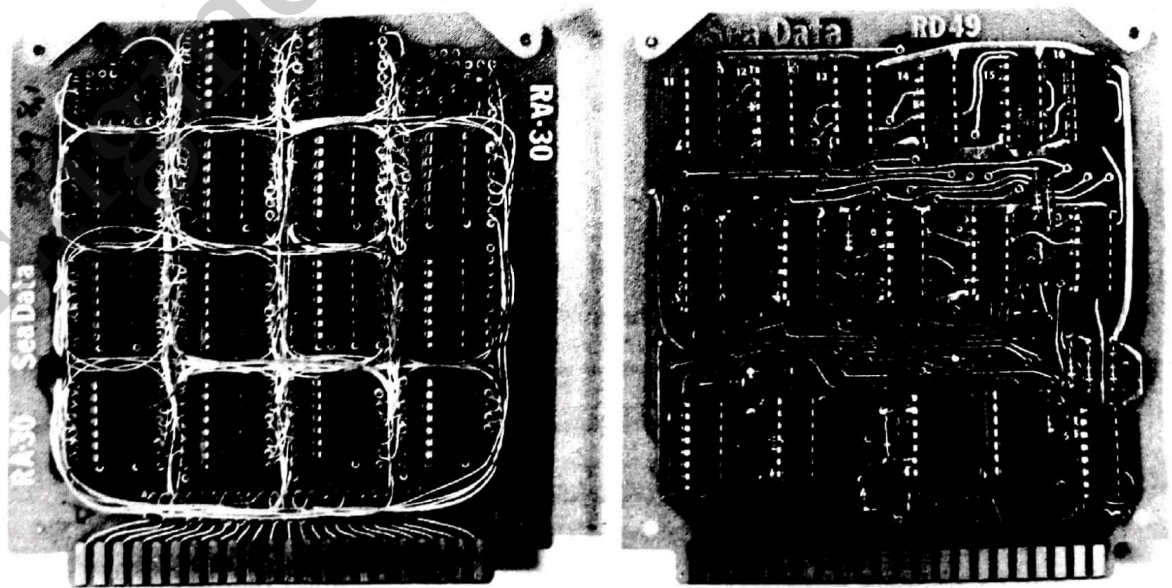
A Wire-Wrap prototype board and its printed-circuit successor. PC boards are less cluttered and far easier to fabricate in quantity. They eliminate wiring errors, too.
